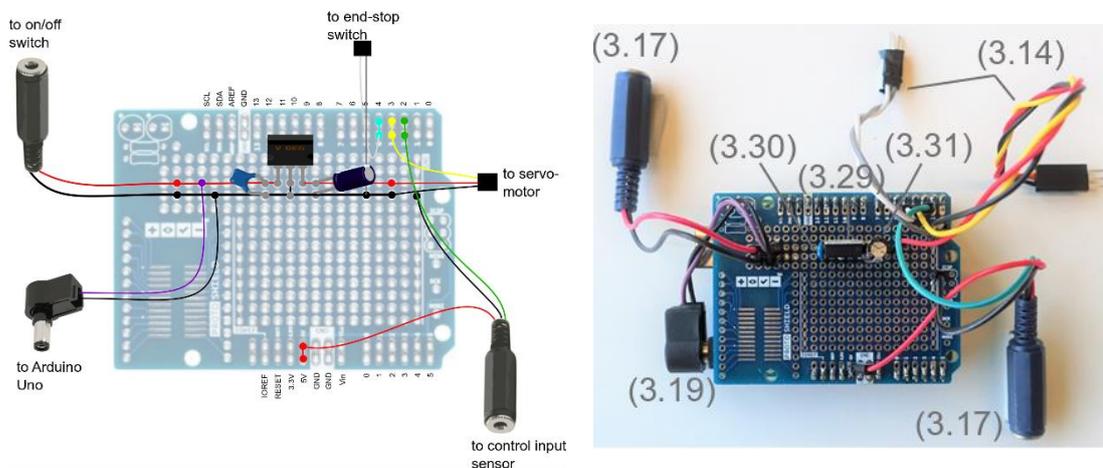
Left: Schematic protoshield with the locations to solder the electronic components and wires to and the loose cables and their respective connectors. Thick points mark the soldering locations. Right: Photo of actual soldered protoshield with numbers of used components.
